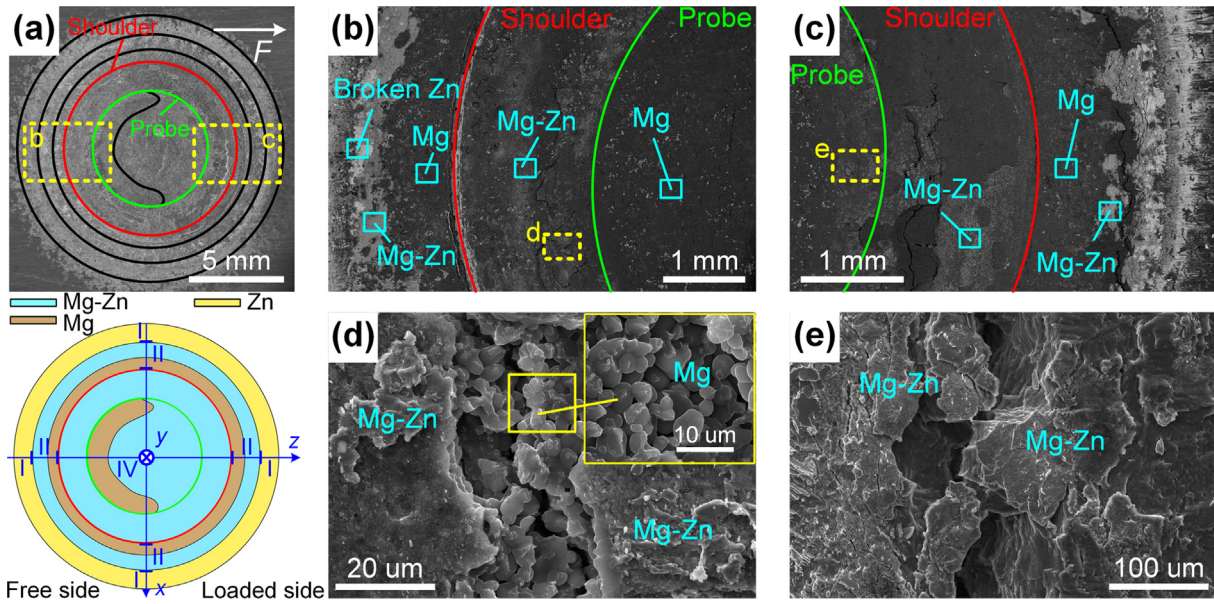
Fractographic analysis of the L-weld. (a) Fracture surface of Mg side and illustration of fracture position. (b-e) Details of marked regions in fracture surface.
